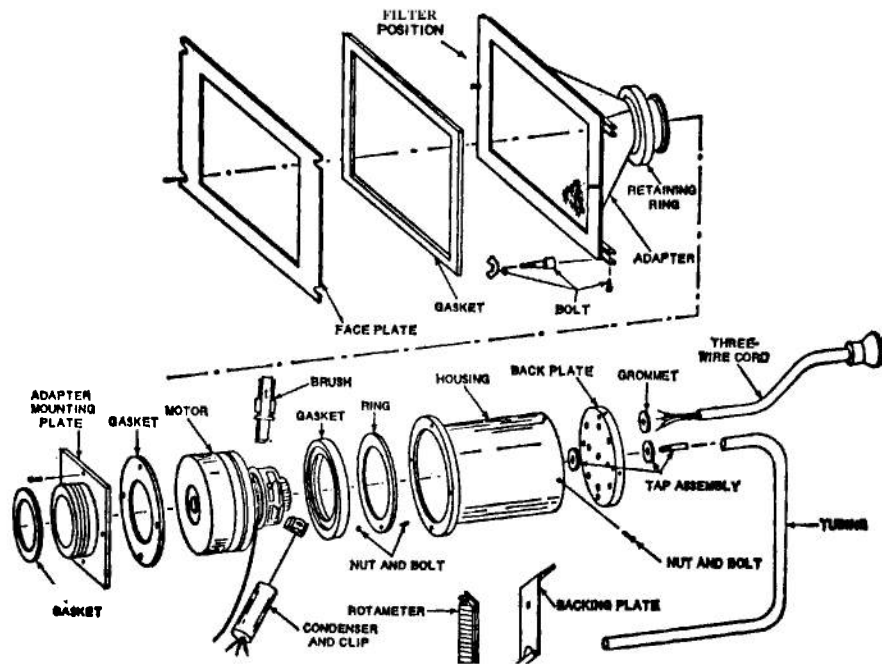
Exploded View of Typical High-volume Air Sampler Parts
